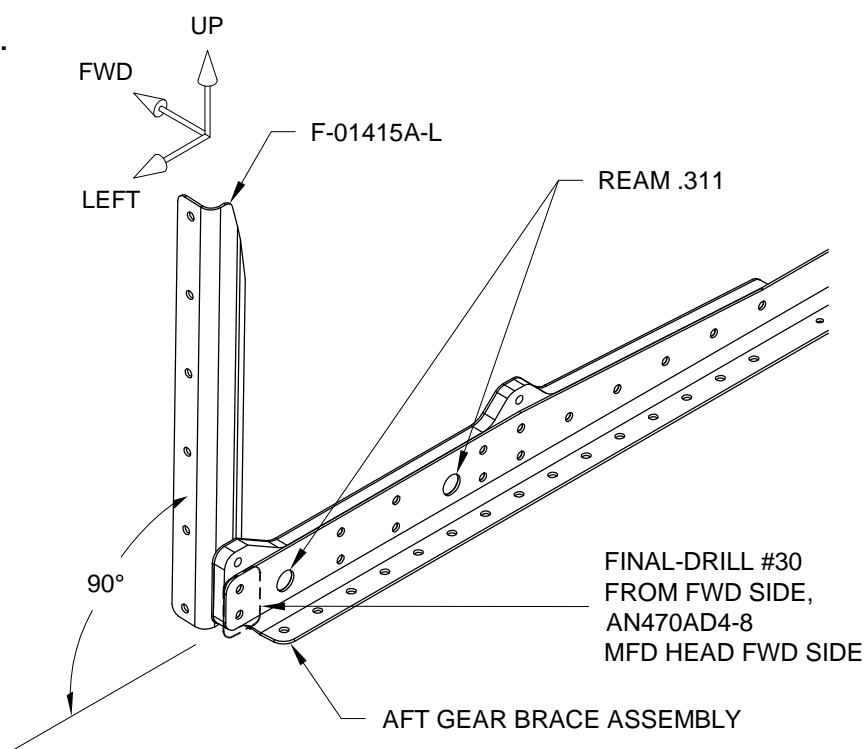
FINAL GEAR BRACE ASSEMBLY
